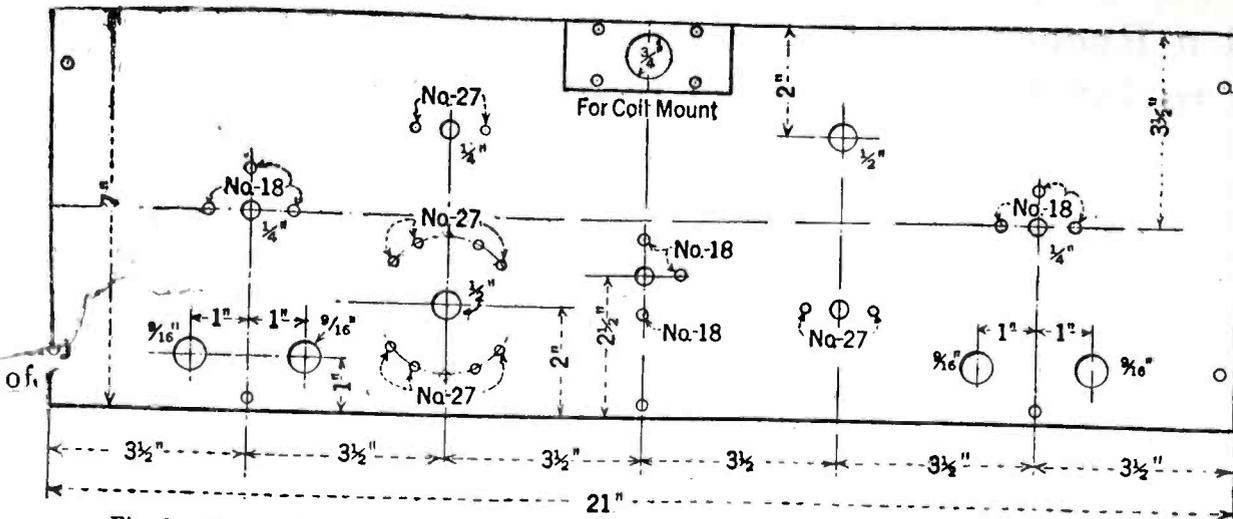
The panel layout for the universal receiver. The numerals near the designated holes indicate the size drills to be used in drilling them.
